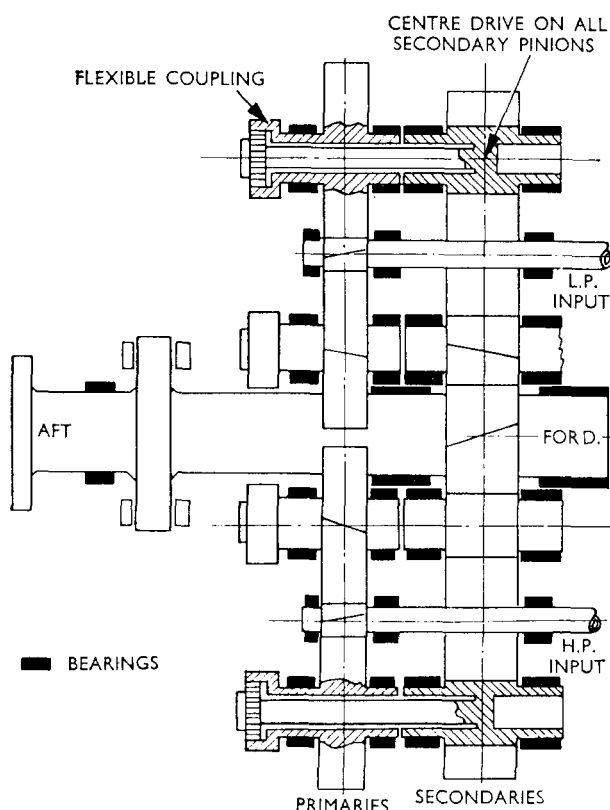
Y.E.A.D.1—ARRANGEMENT OF GEARS
